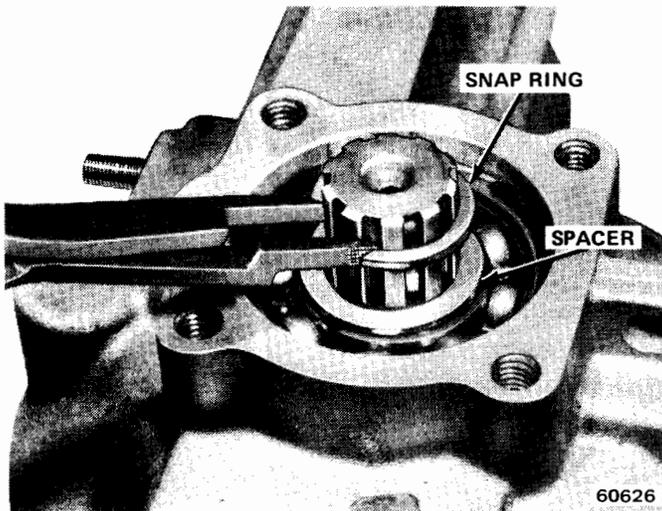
Removing-Installing Main Shaft Snap Ring
